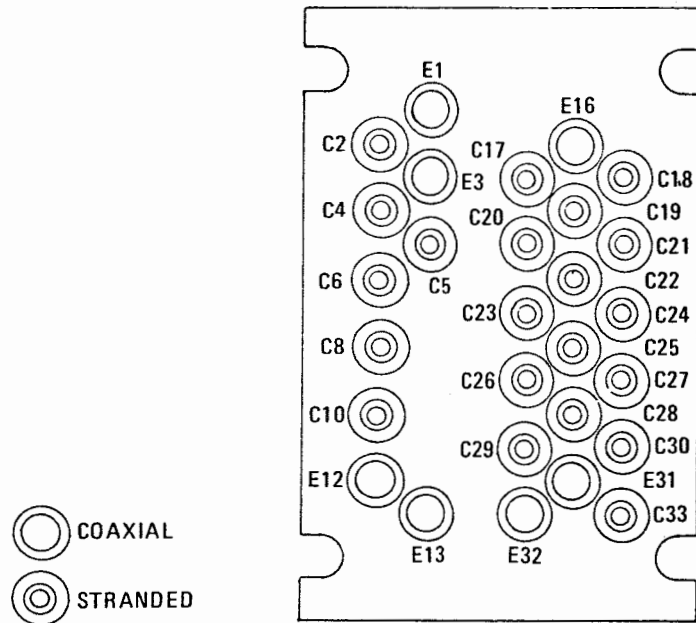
Filter Plate Assembly A2A8FL1 Component Locations
